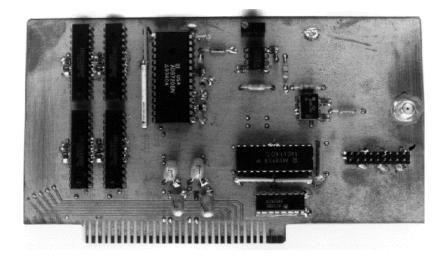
A Milled Circuit Construction Prototype Board (Top View)
